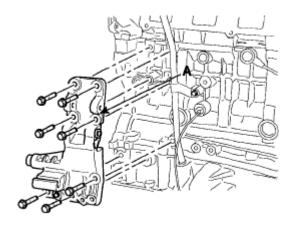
Identifying Oil Level Gauge Assembly Courtesy of HYUNDAI MOTOR CO.
